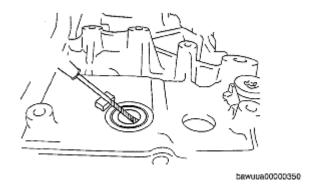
Removing Oil Seal (Transaxle Case Side) Courtesy of MAZDA MOTORS CORP.
